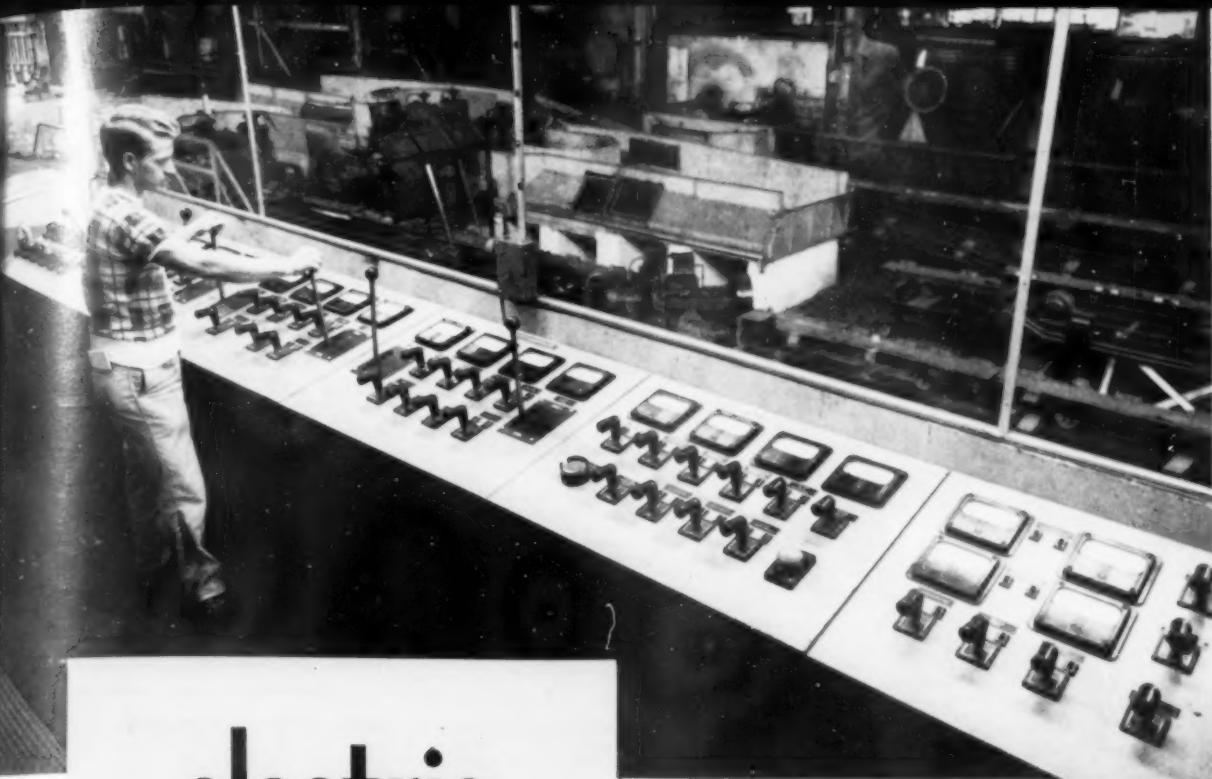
Remote controls insure safety to the operator and better machine operations.
